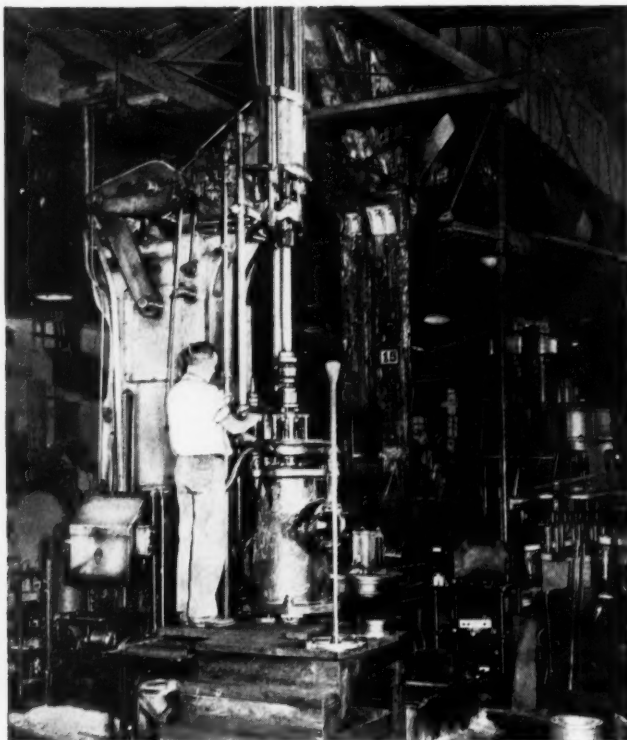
Close-up View of One of the Machines Illustrated in Fig. 1, Showing Eight Cylinder Bores being Honed Simultaneously in an Automobile Engine Block
